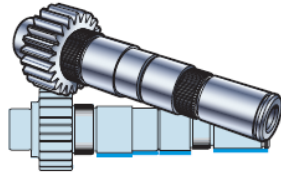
Turning vs. grinding in machining pinion shaft. [fot. Sandvik Coromant]
